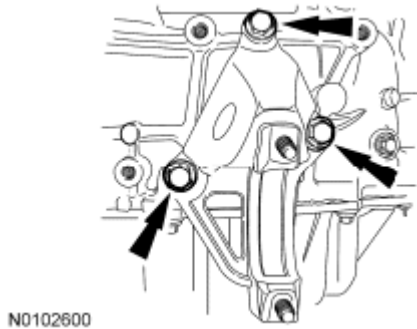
Locating Intermediate Shaft Bracket And Bolts
